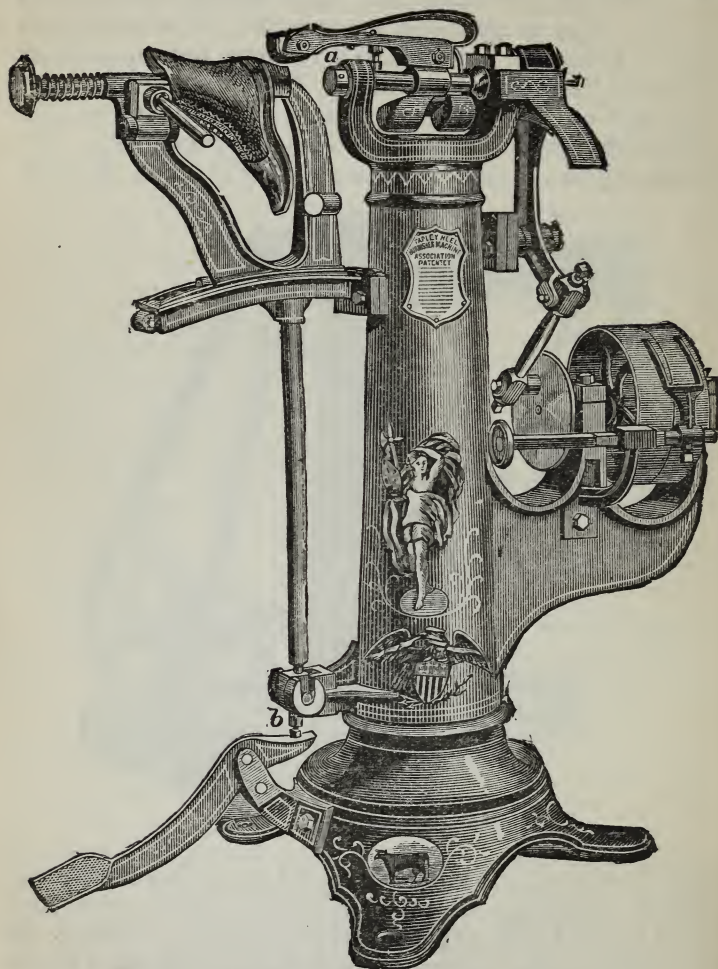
TAPLEY PATENT BURNISHING MACHINE.
